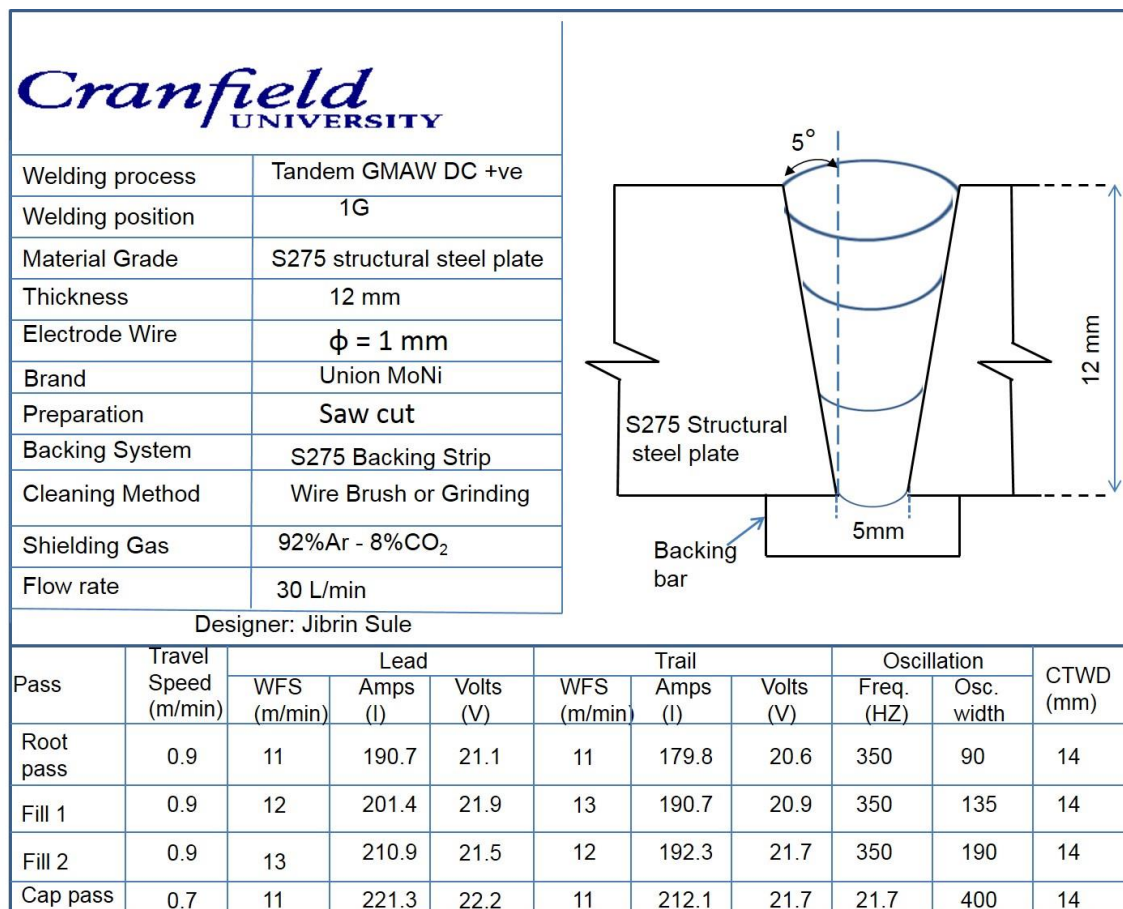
Welding parameter for the S275JR Structural Steel
